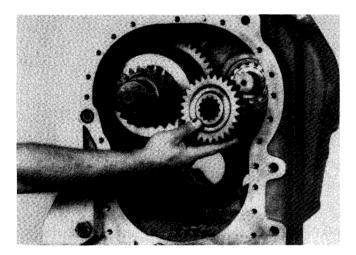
Install low (1st) speed drive gear on clutch shaft.
